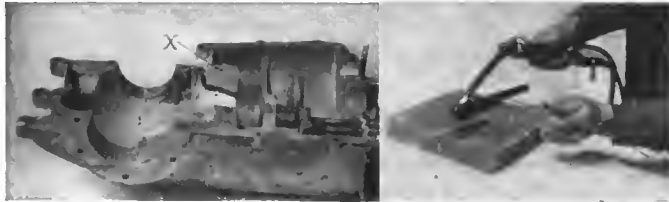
On the right is a view of an operator welding a spoke, and on the left is an aluminum gear case, the entire portion of which at X above the black line was built up from a bar of aluminum, thus providing an inexpensive method of remedying what has all along constituted one of the most costly items of maintenance to the autoist, replacing gearboxes and crankcases.
